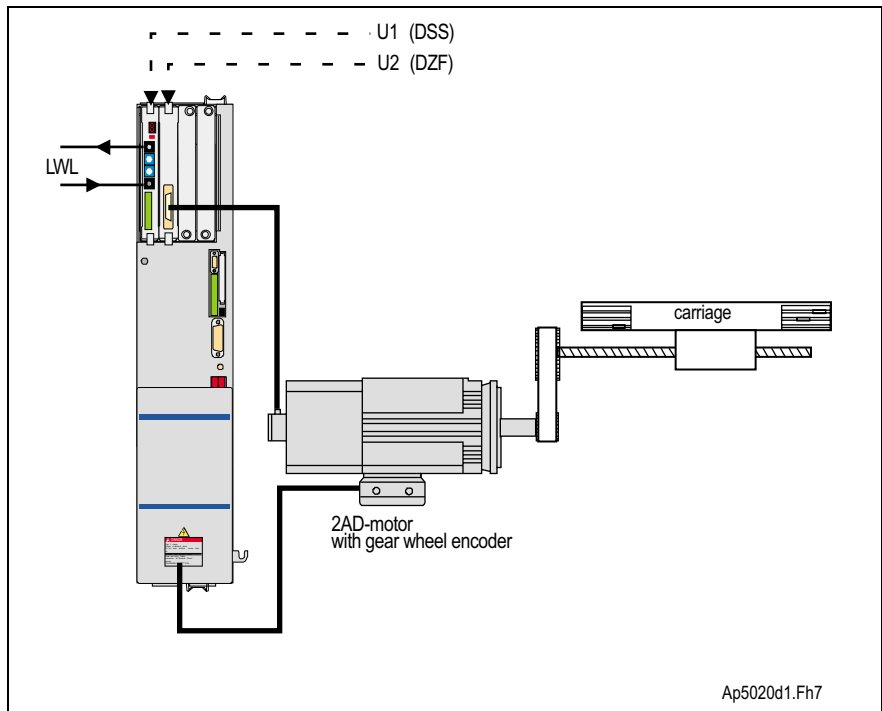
2AD motor with gear wheel encoder, connected to a DZF02.1M plug-in module
